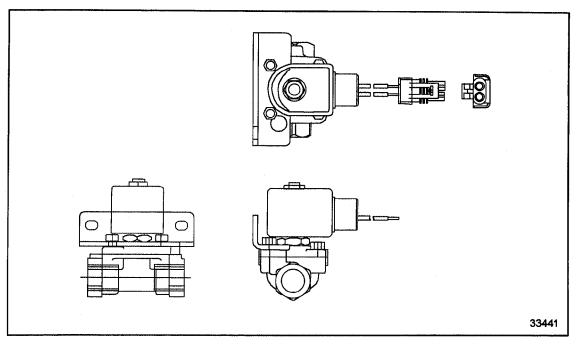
Fuel Shutoff Valve for Series 60G Engine
